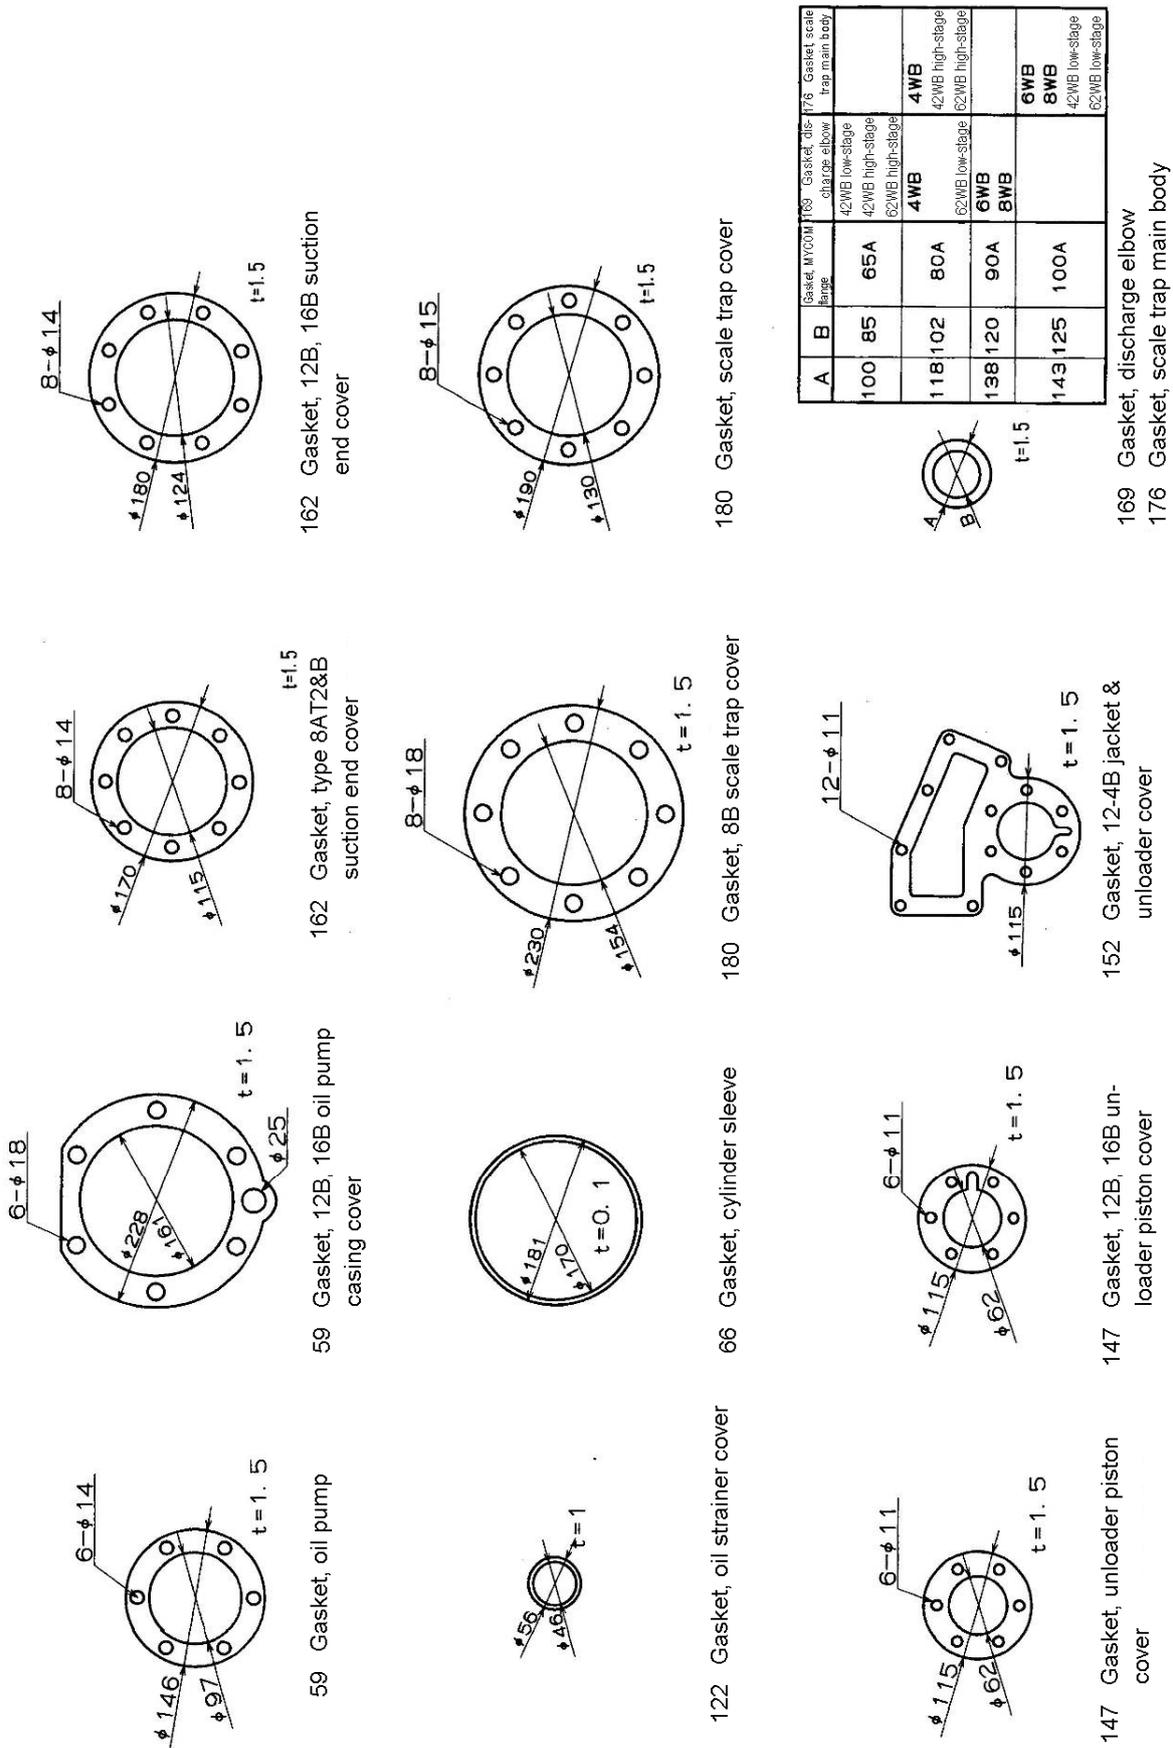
Gaskets for WB-type Compressors (2/2)
